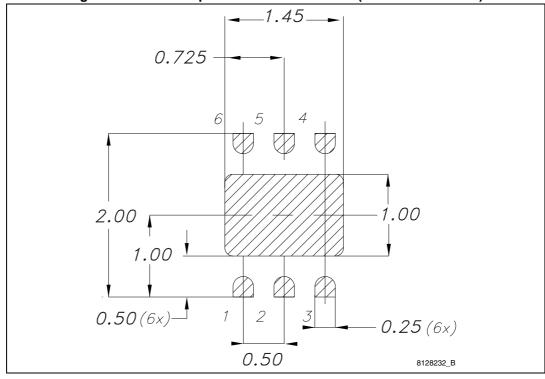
DFN6 footprint recommended data (dimensions in mm)
